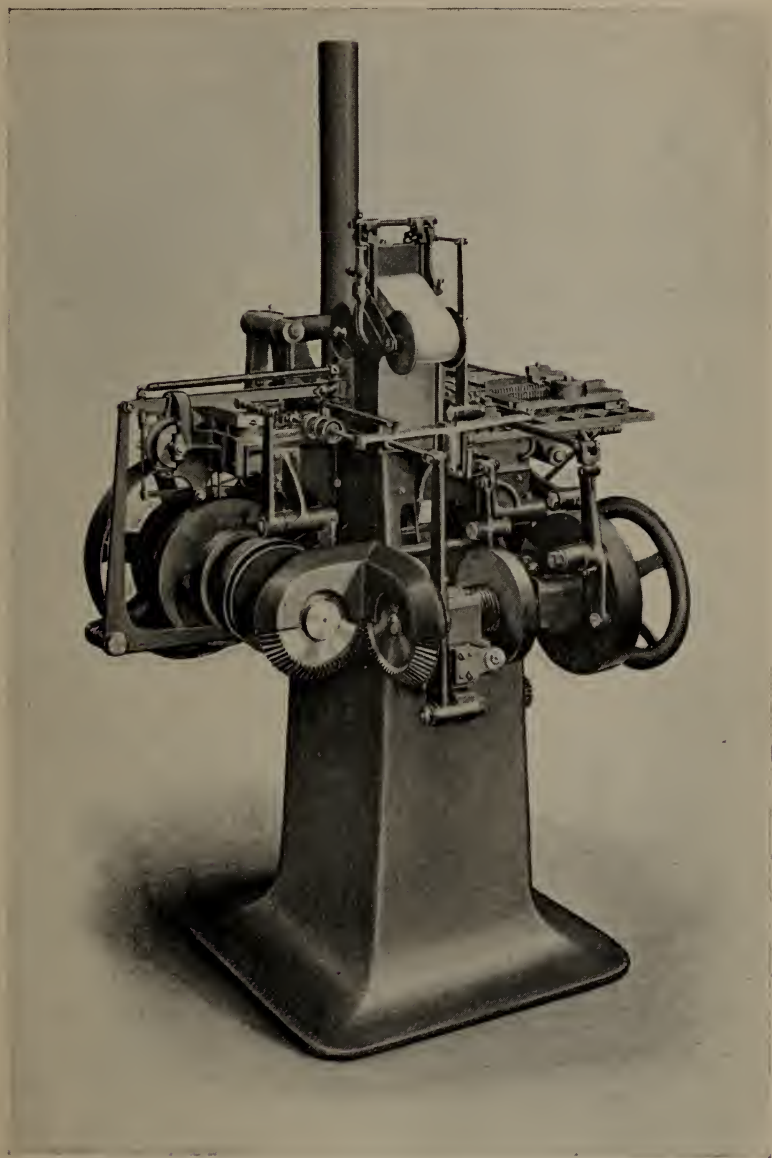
PLATE III.—REAR AND SIDE VIEW MONOTYPE CASTING MACHINE.
